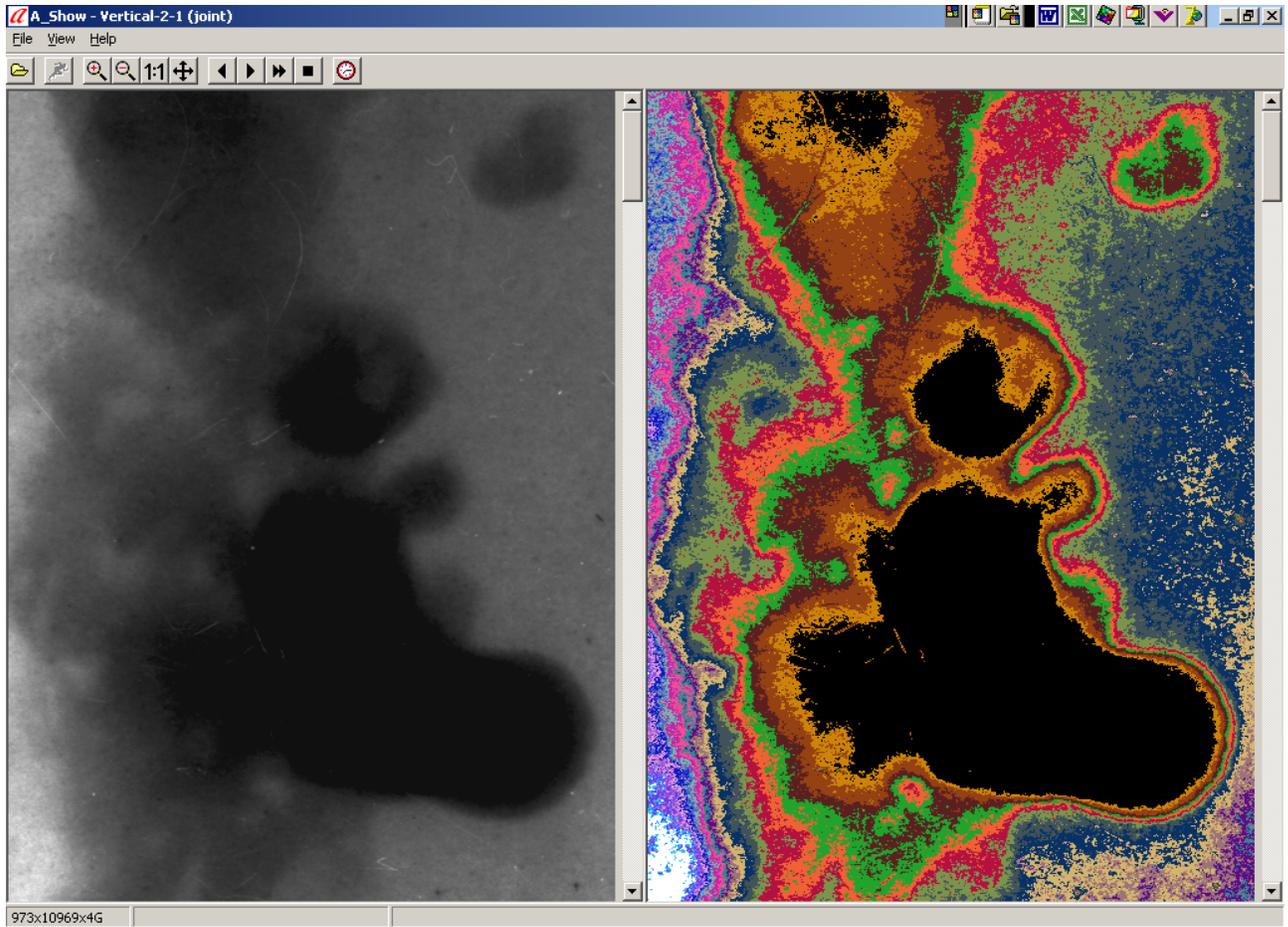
Welded seam with crack before processing (left) and after processing (right).
